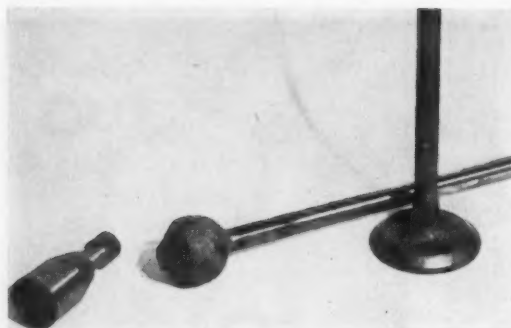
(Right) An engine valve produced by resistance upsetting and forging; (center) the upset from which the valve was forged; (left) an end fitting produced by upsetting and then piercing.
